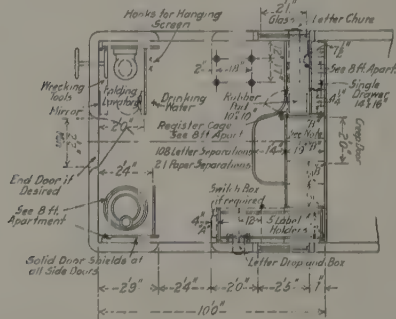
Floor Plan of 10 ft. Mail Apartment.
